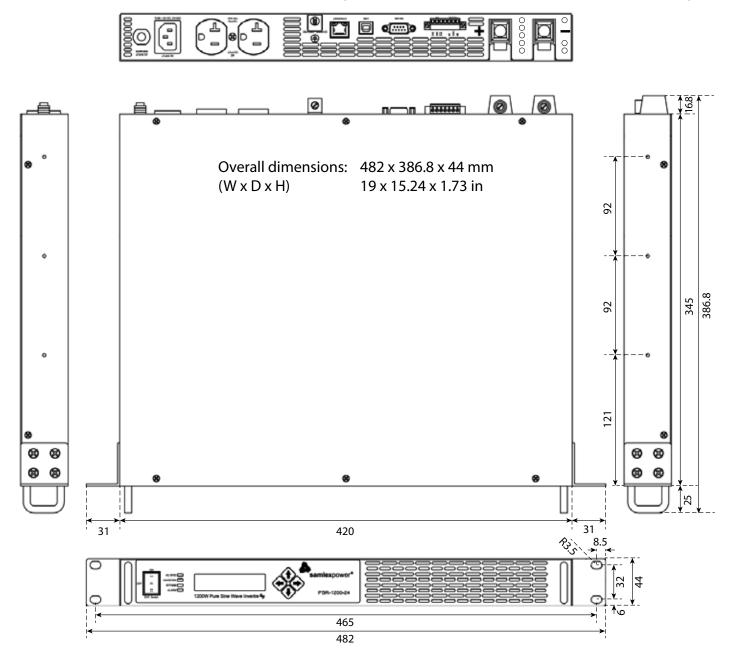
PSR-1200-24 & PSR-1200-48 - Overall Dimensions & Mounting Arrangement
